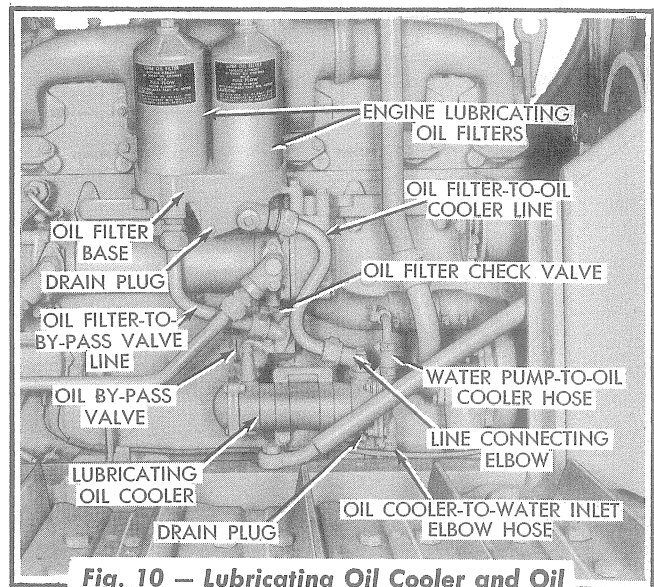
Lubricating Oil Cooler and Oil By-Pass Valve Location (Tractors Prior to Serial No. 4001)
